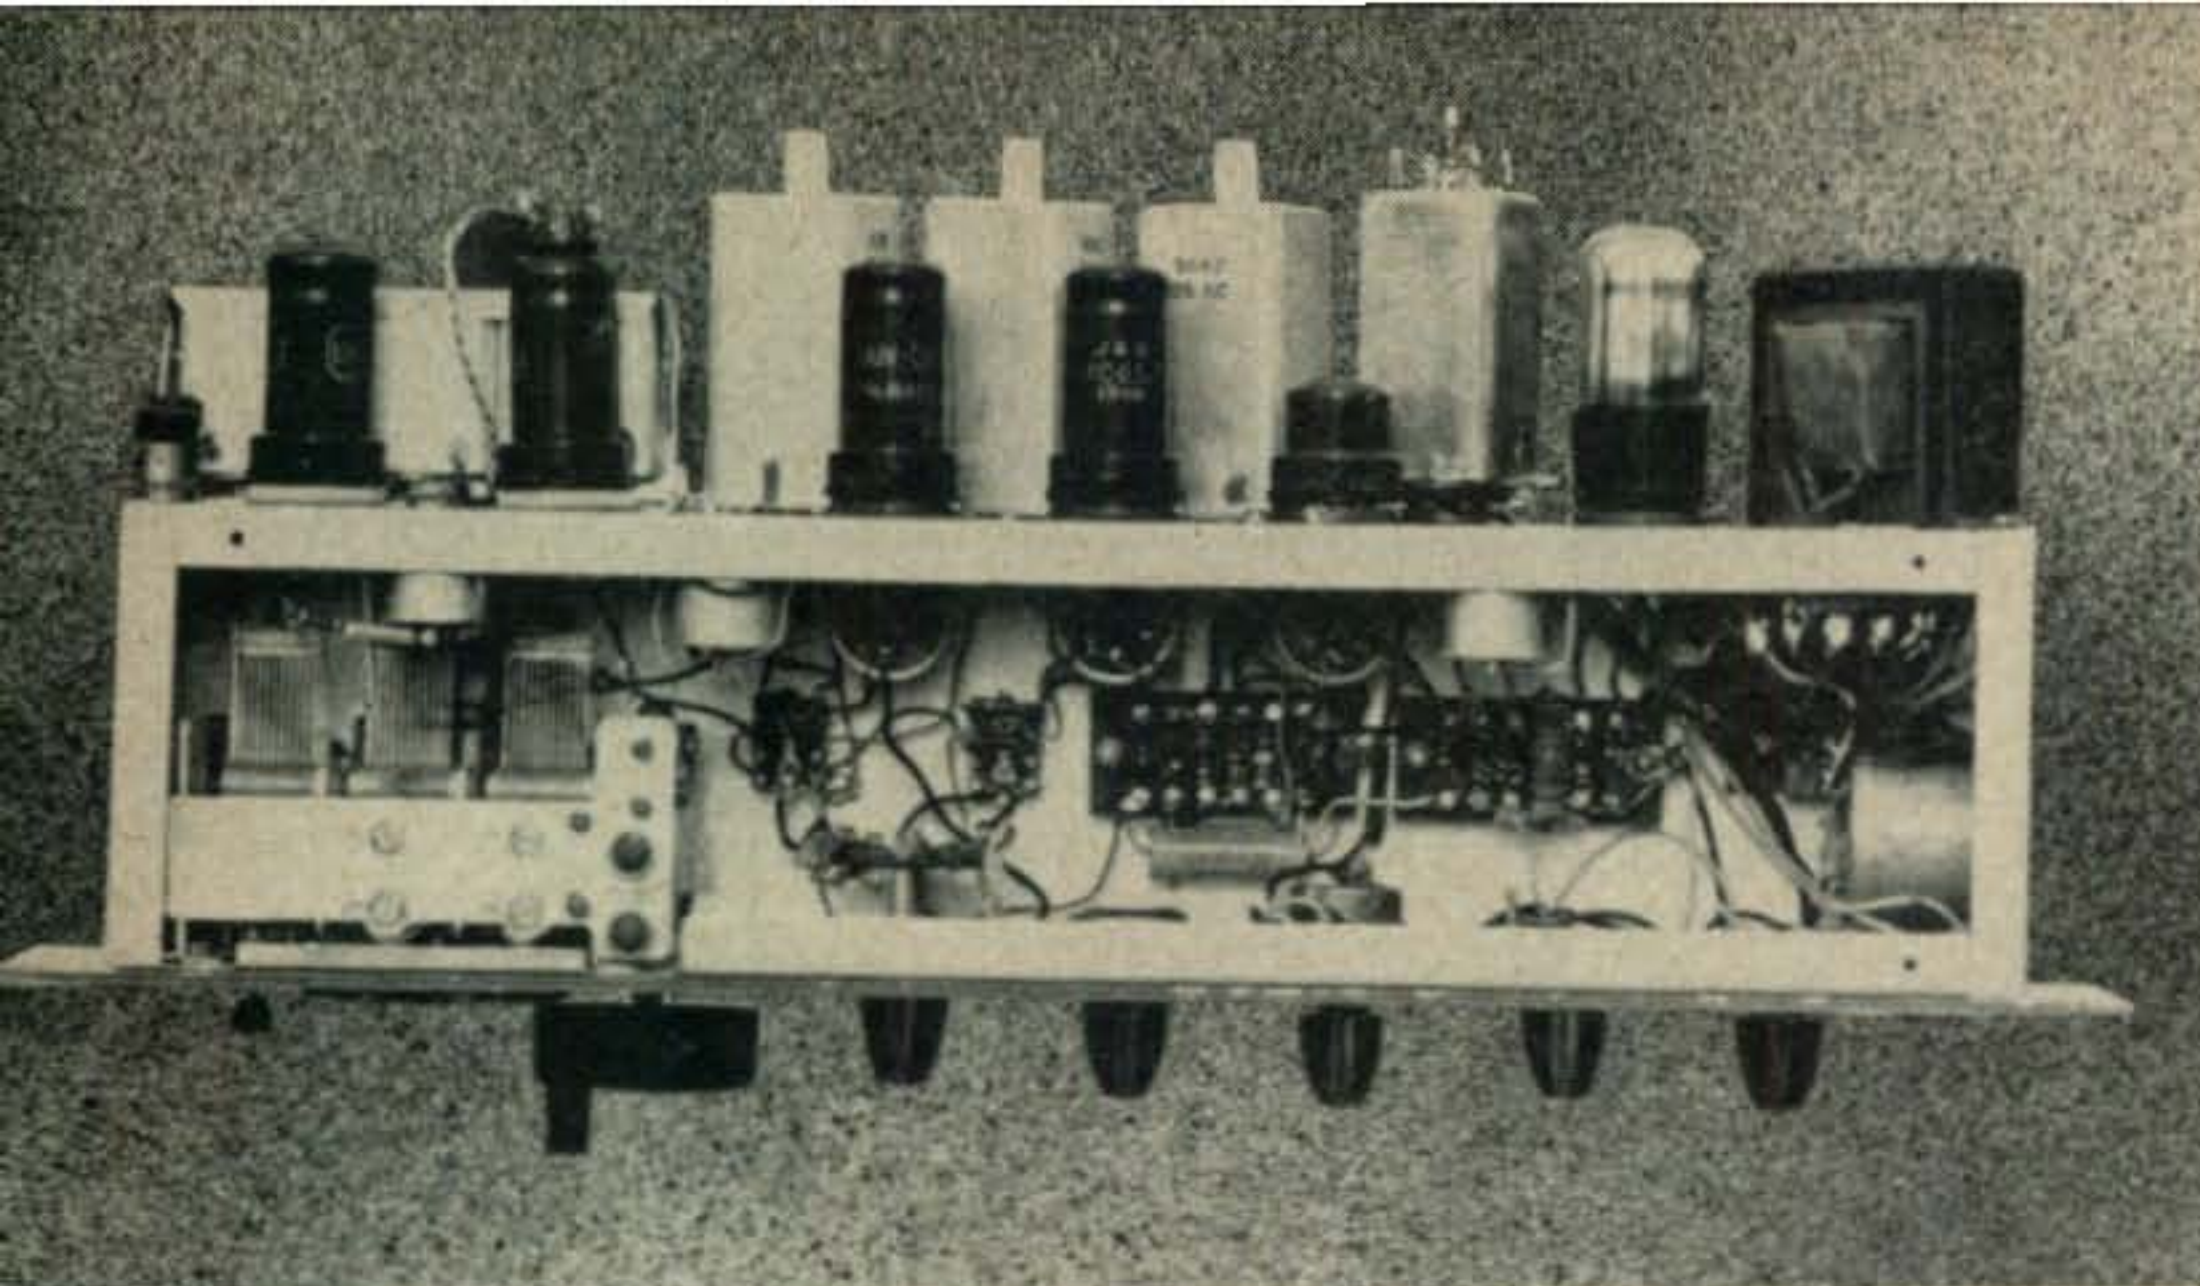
Wiring under the chassis is kept simple if a parts layout like this is followed.
